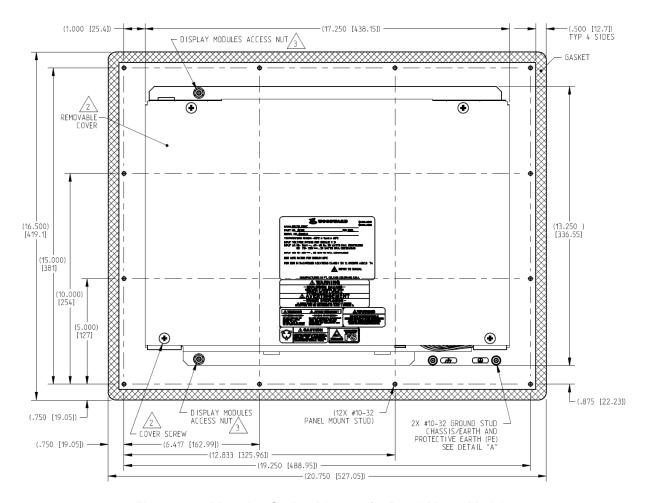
Mounting Outline Diagram for Panel-Mount Models
